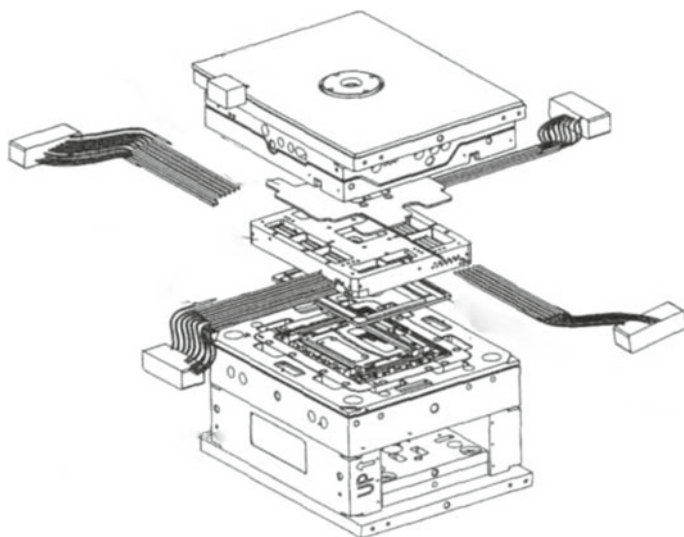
Electric heating rapid heating cycle injection mold [55]
